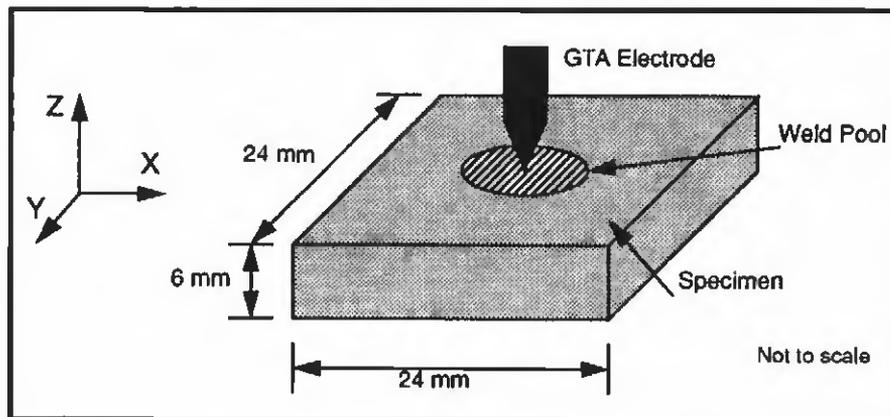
Schematic diagram of the workpiece and the weld pool.
